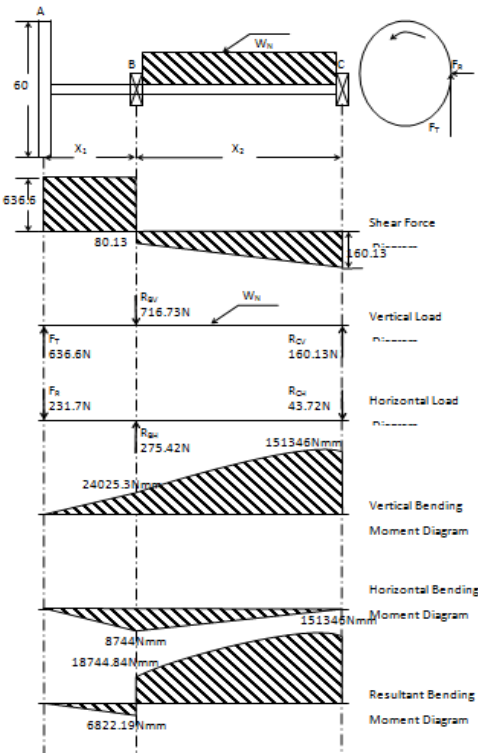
Sketch of loads, stress and bending moment for pelletizer driven shaft
